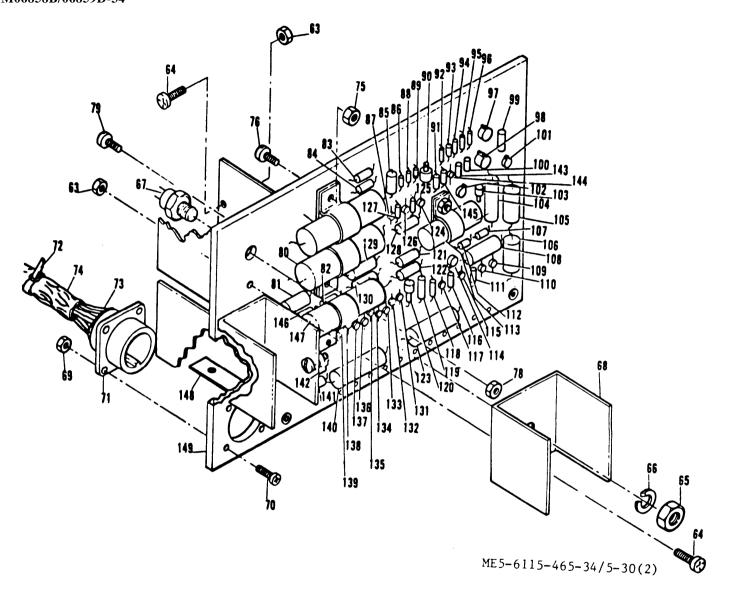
Static Exciter and Voltage Regulator Assembly, Exploded View (Sheet 2 of 3)
